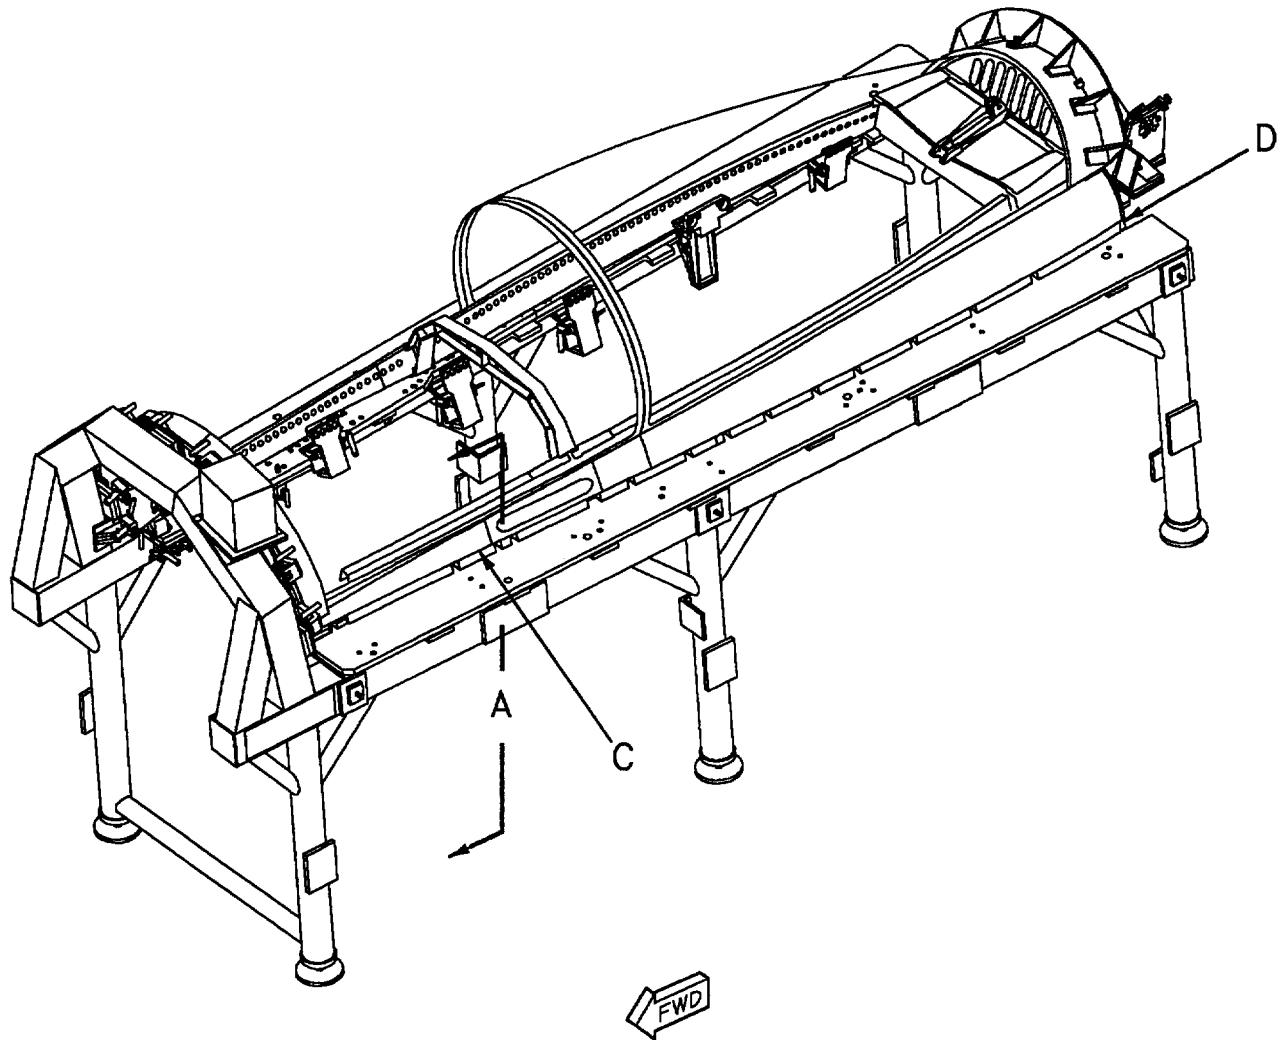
Inspection and Replacement - Seal Guide (Sheet 1)
